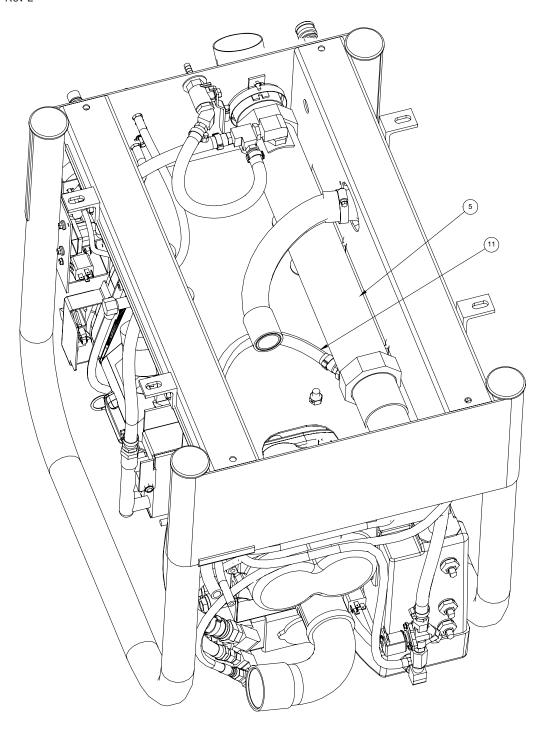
Machine Assembly - Bottom View D-2793 Rev L
